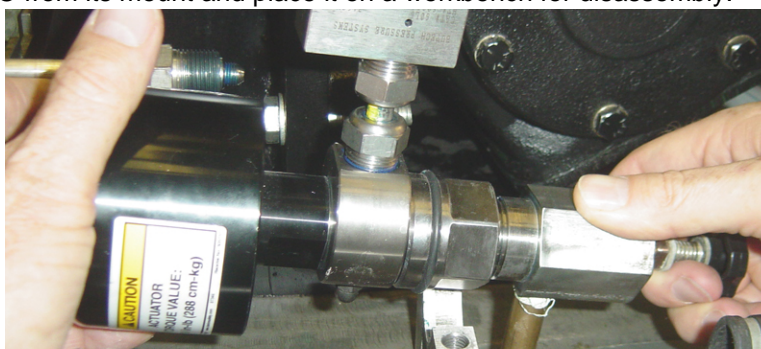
Remove the ADO from the Pump for Disassembly and Seal Replacement
